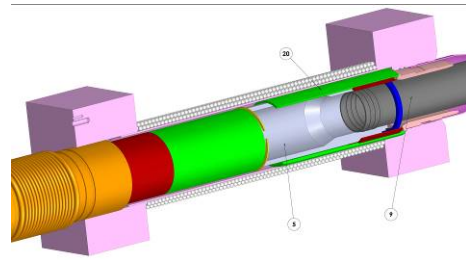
Schematic representation of the pressure tube crimping on the inside of end fitting
